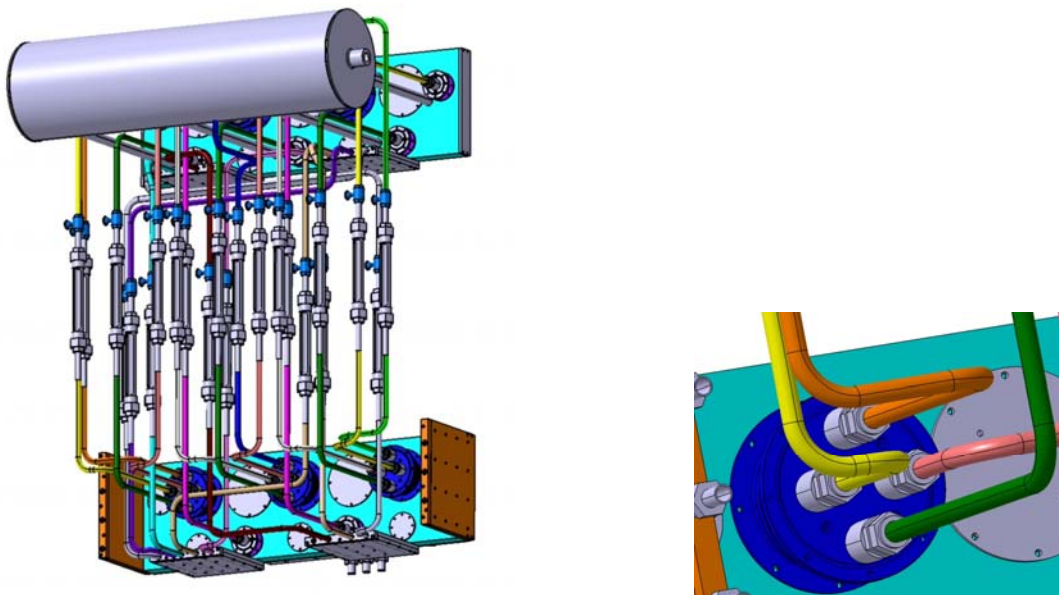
3D CAD design of the GRICAMAN C experiment, right side: connection of tube elements.
